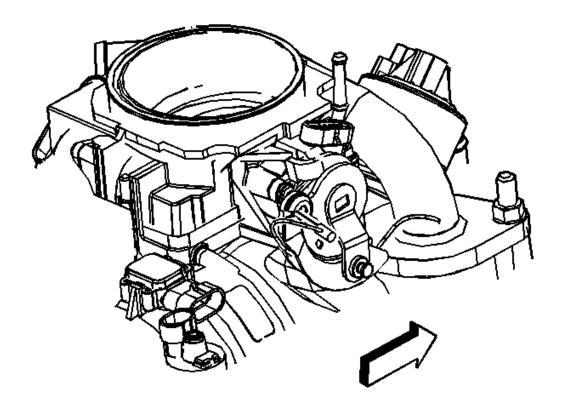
View Of Accelerator Cable & Throttle Body Lever Courtesy of GENERAL MOTORS CORP.
